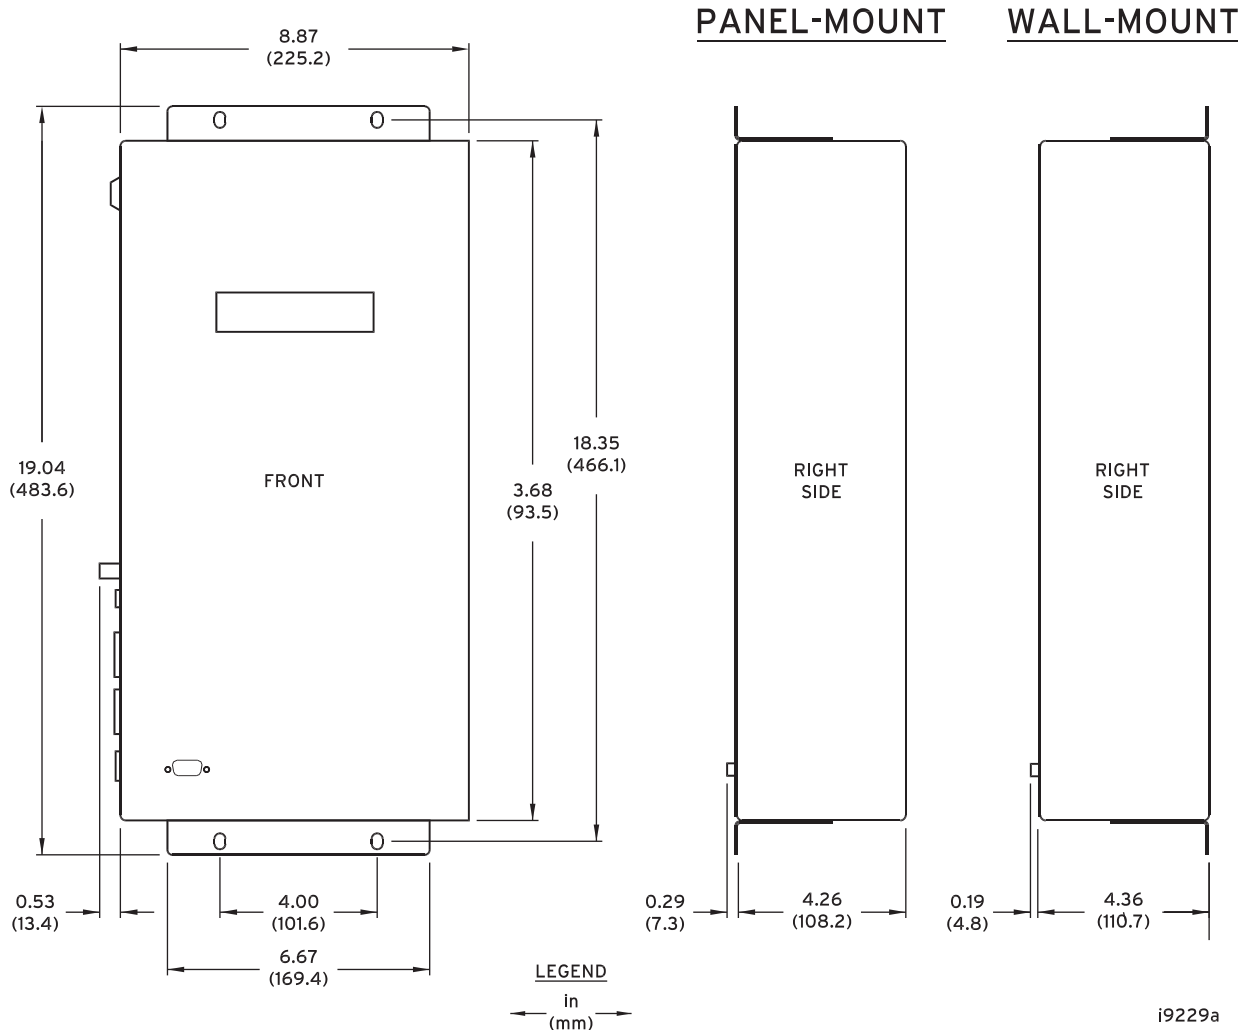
SEL-351RS Kestrel Control Module Dimensions
